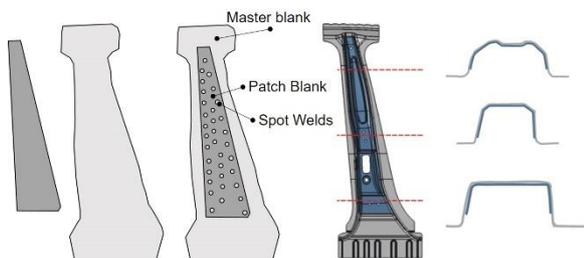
Geometries of the main blank and patch for the B-pillar: (a) before, (b) after the spot welding process, (c) after hot forming [68]
